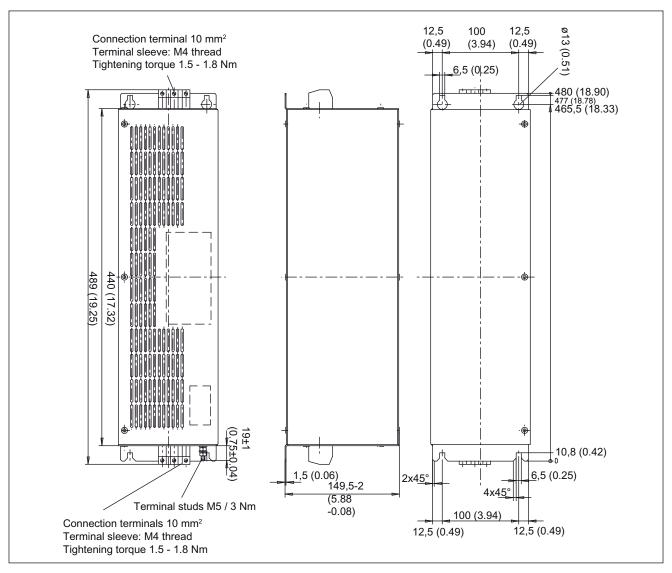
Dimension drawing of Wideband Line Filter 16 kW for Active Lines Modules, all dimensions in mm and (inches)
